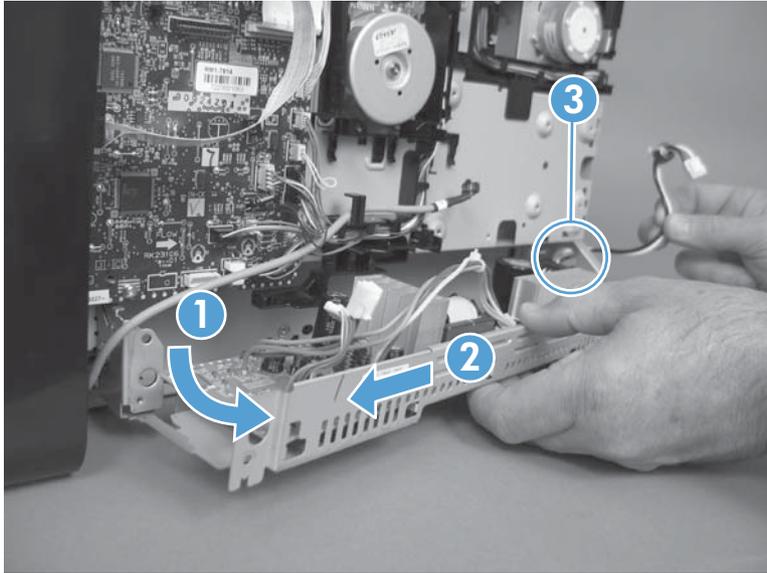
Remove the power supply (low voltage; 7 of 8)
